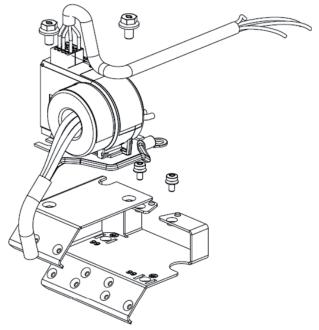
Fitting the RCMB on the Mounting Plate
